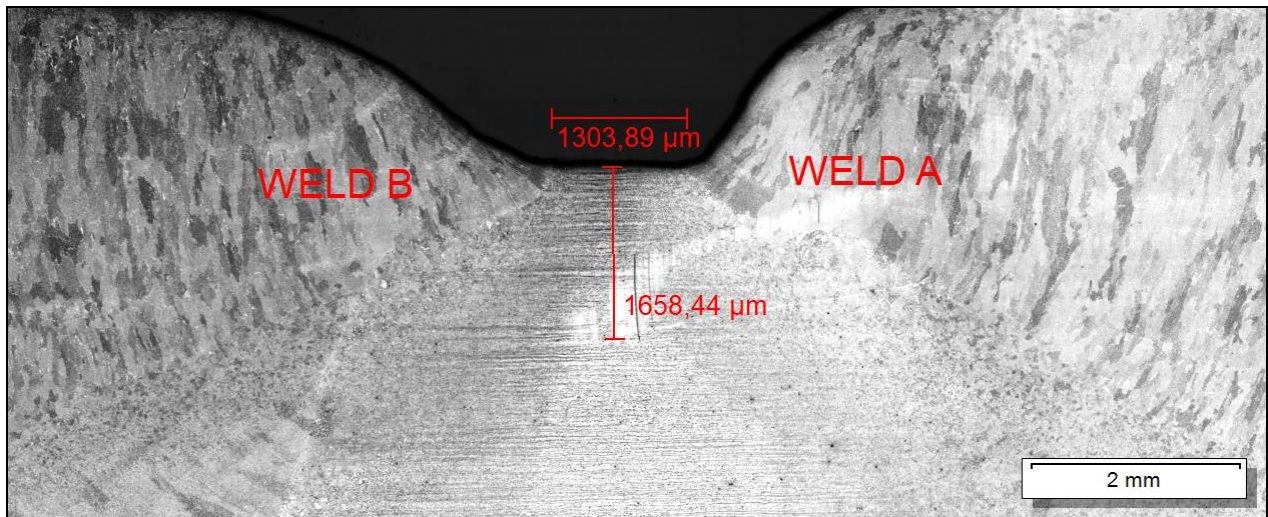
Overlapping HAZ in specimen 8612-4 PL7. Weld A is the initial weld and Weld B is the secondary overlapping weld. Distance between the weld toes are 1.3 mm and HAZ are overlapping 1.7 mm from the top surface.
